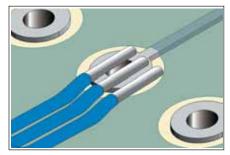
Not Recommended Multiple wires soldered to pad overhanging pad edge.
